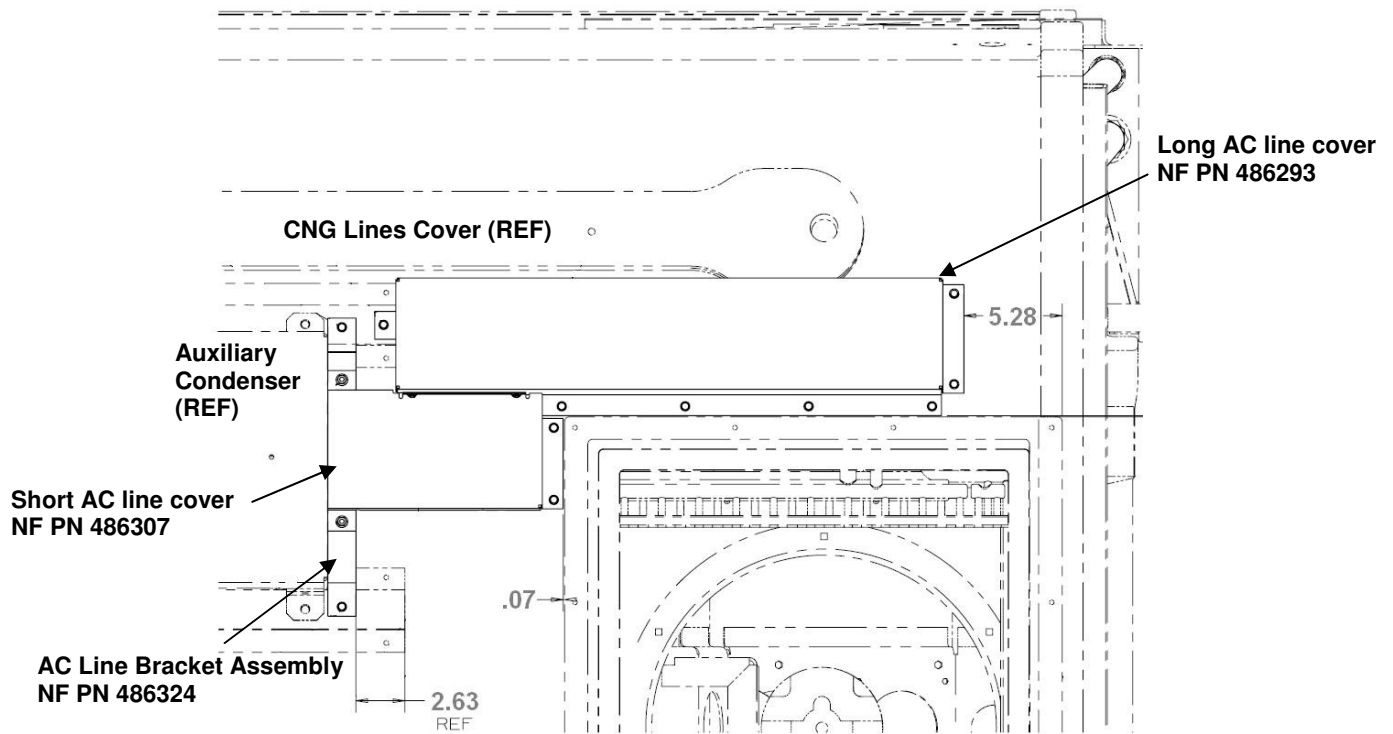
AC Line Covers Installation – View Looking Down at Bus Roof
